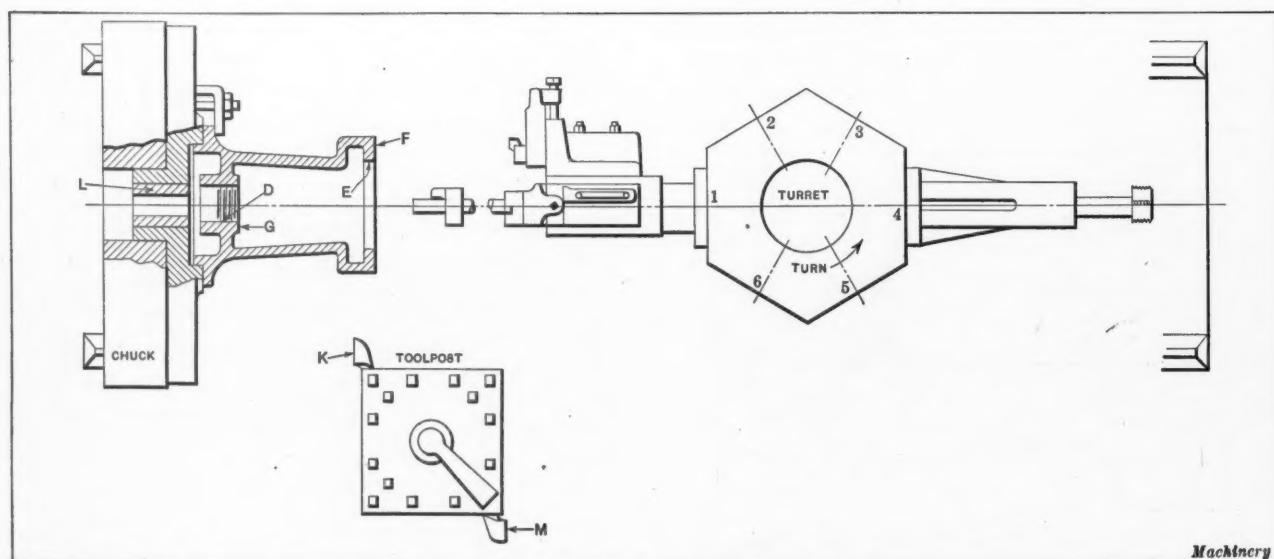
Tooling Equipment for Second Operation on Axle Housing
